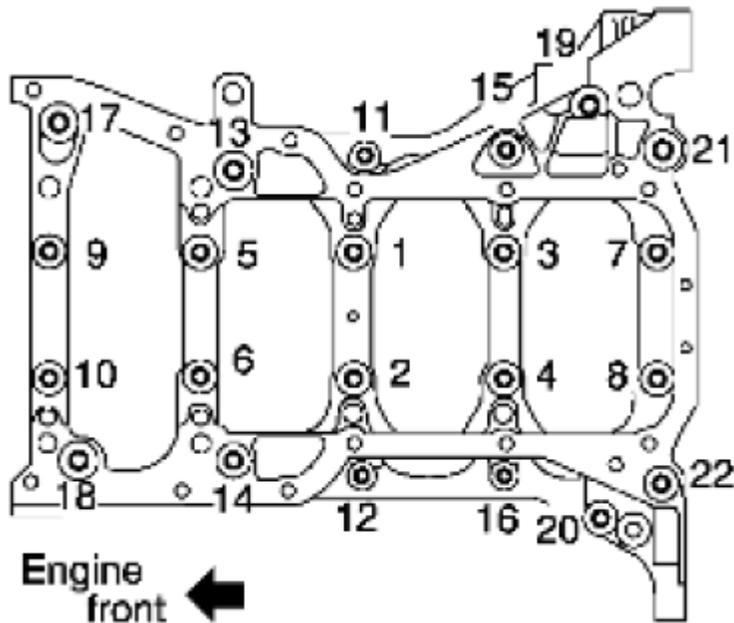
Tightening Order Of Lower Cylinder Block Bolts
